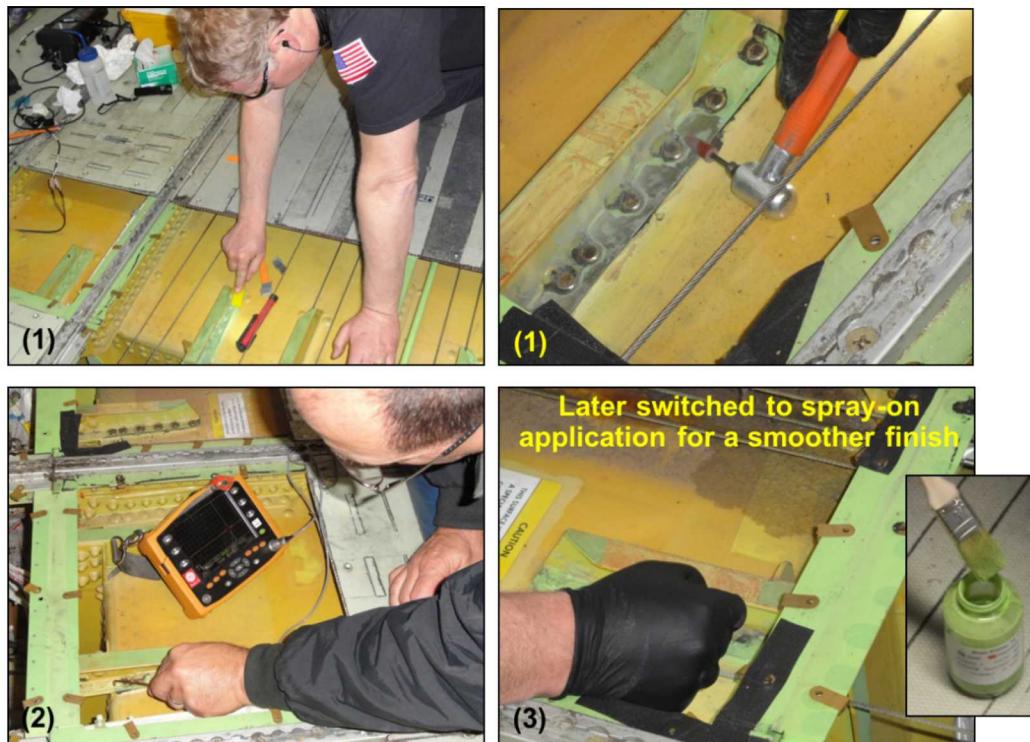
CVM Installation Steps – 1) Remove Rivet Head Sealant, Fuel Vapor Barrier and Primer, 2) Inspect for Cracks with HFEC, and 3) Re-Prime Surface
